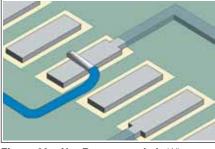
Not Recommended Wire perpendicular to conductor; contact, SMT pad.
